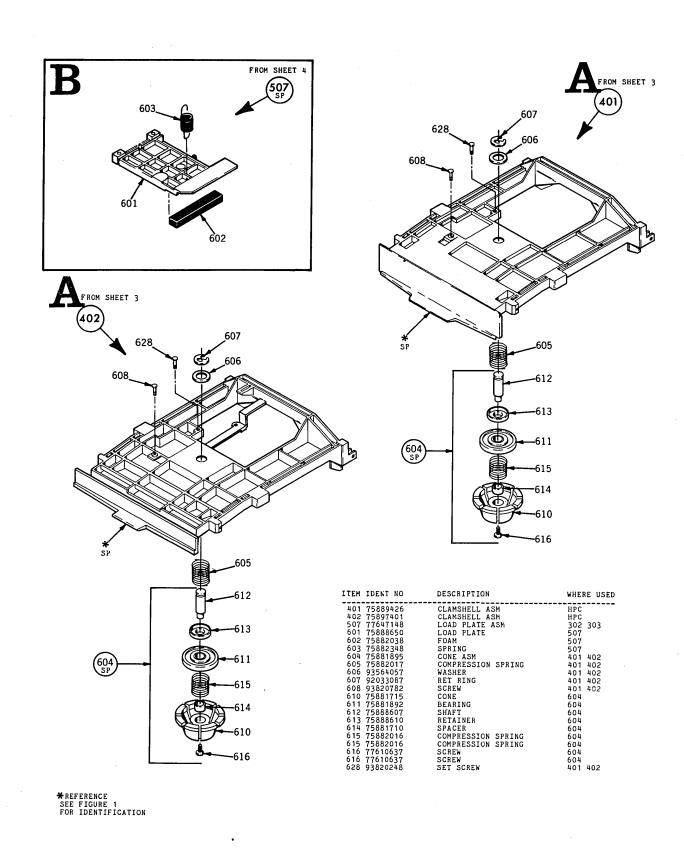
CLAMSHELL AND LOAD PLATE ASSEMBLIES
